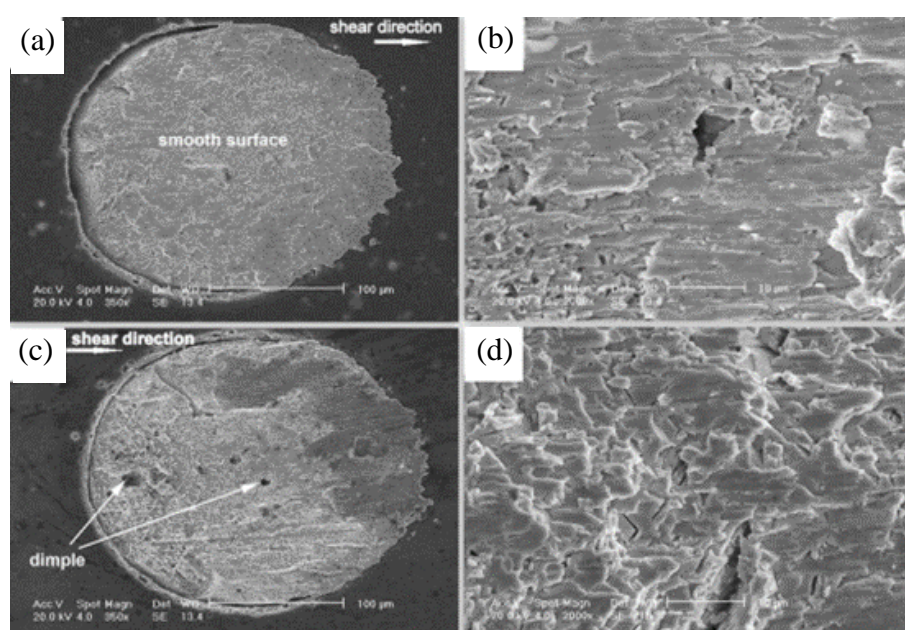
Fracture Surfaces at Different Magnification: (a and b) Sn-Bi Solder; (c and d) Sn-Bi solder with 0.50 wt.% Al_2O_3 (Hu et al., 2015)
